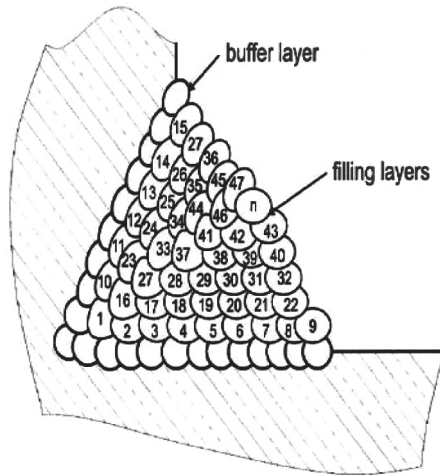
Order of execution of welding work: buffer layer and filler layer [4]
